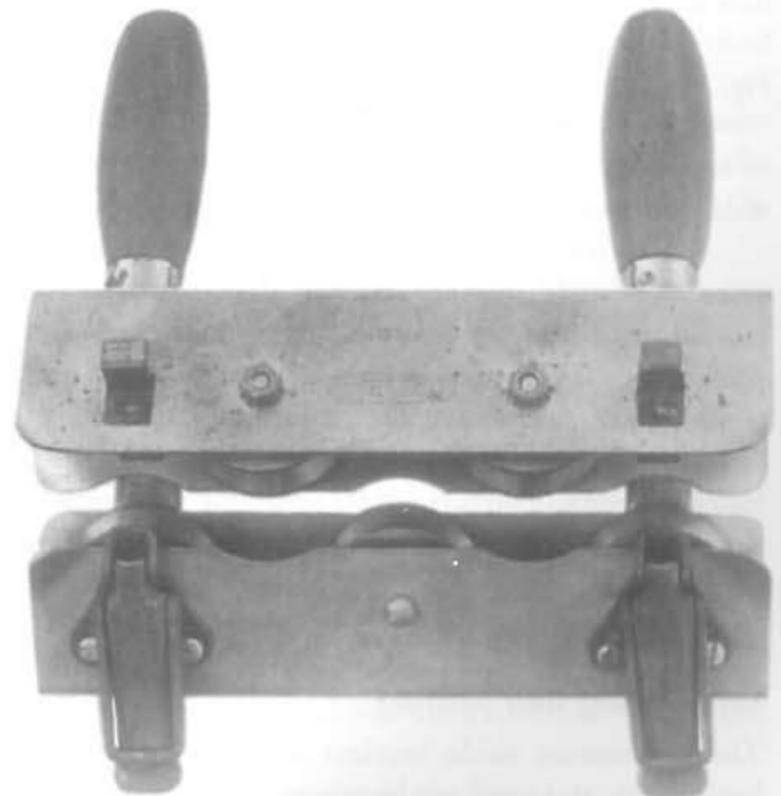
Roller straightener MM CABLES PYROTENAX
